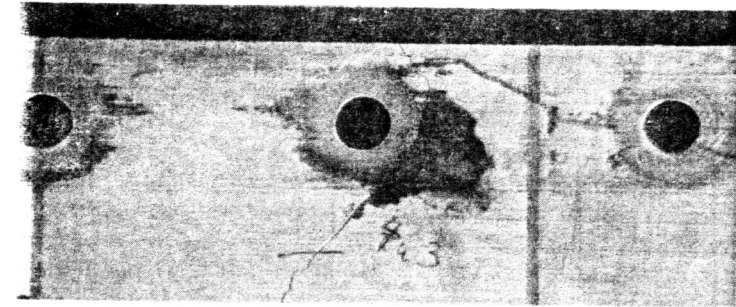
Fretting fatigue crack forming at edge of bolt pressure area
